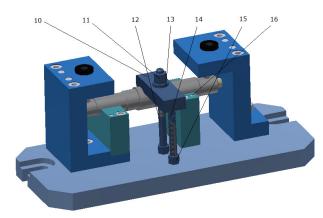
3D model of the fixturing device: 10 – fixing clamp; 11 – hexagon nut with collar; 12 – screwed bolt; 13 – conical hole plate; 14 – variable supporting pin; 15 – thick hexagon nut; 16 – B-type cylindrical pin.
